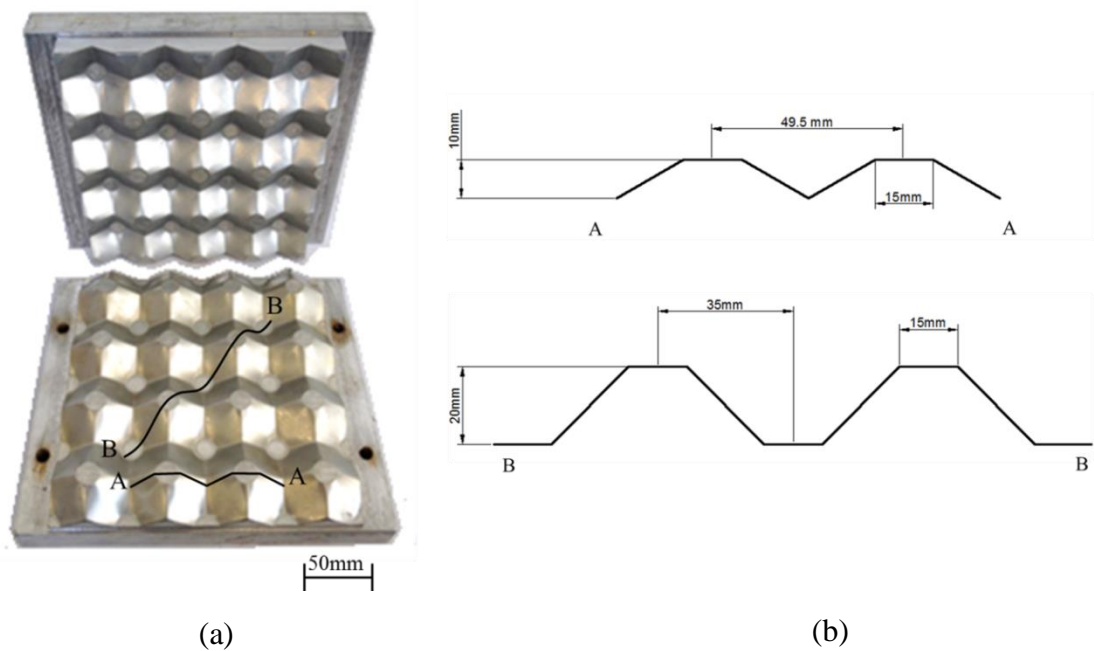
Photographs of the (a) aluminium flat-roof contoured moulds (egg box mould) (b) cross section of the geometry.
